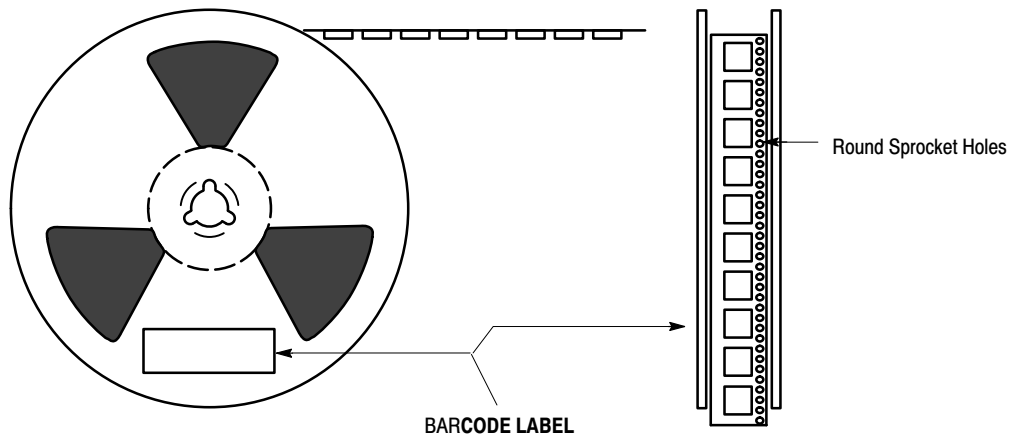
Round Sprocket Holes Used with 8 mm, 12 mm, 16 mm and 24 mm Tape (holes on one side only)
